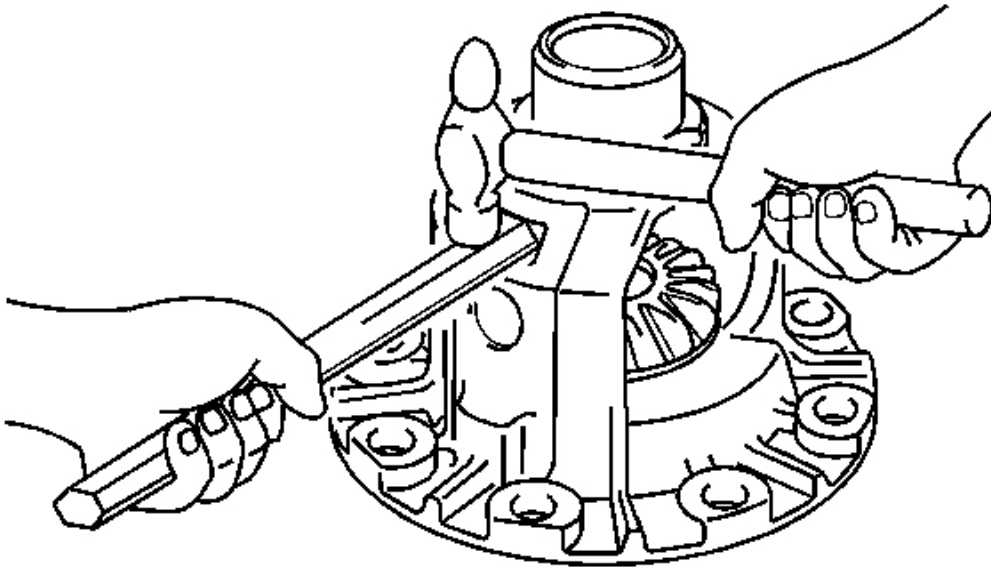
Staking The Differential Case Using A Hammer & Chisel
